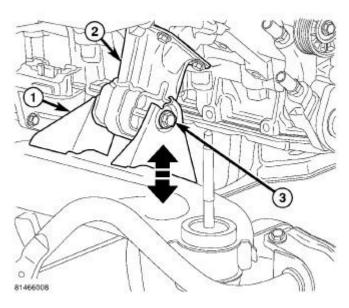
ENGINE MOUNT BOLT Courtesy of CHRYSLER LLC
